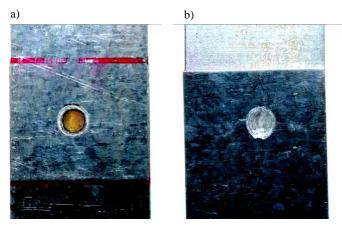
Marks of welding tips: a) standard RSW, b) DeltaSpot $\ensuremath{\mathsf{RSW}}$
